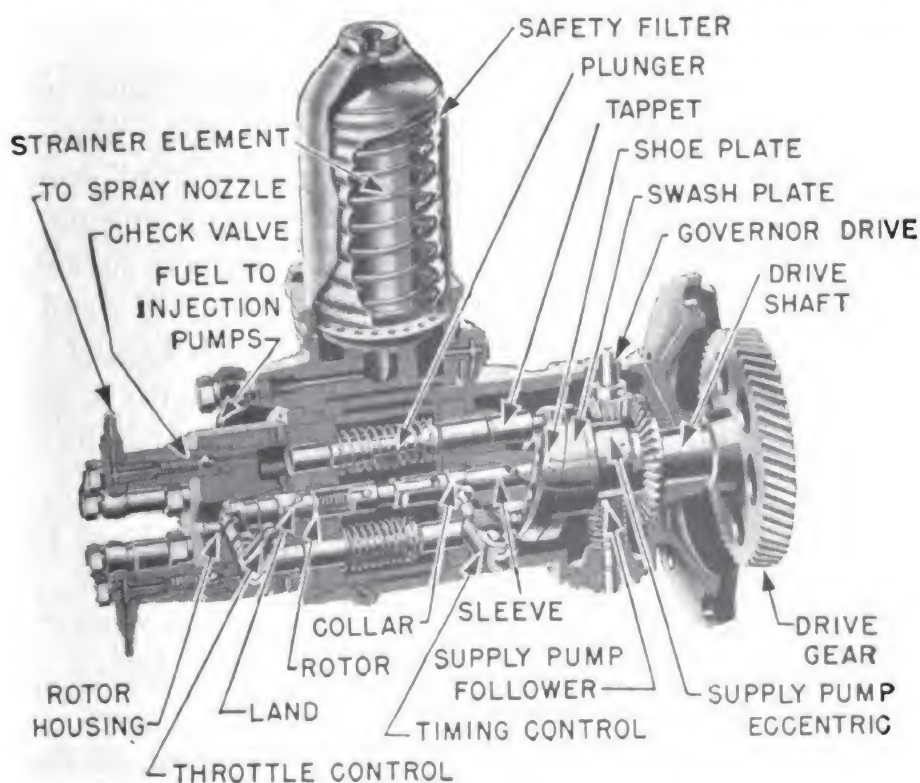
Cutaway view of Ex-Cell-O injection pump and filter.
